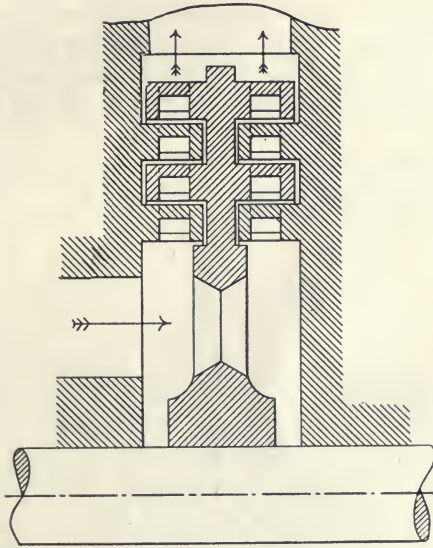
SECTION THROUGH REYNOLDS' STEAM TURBINE.
